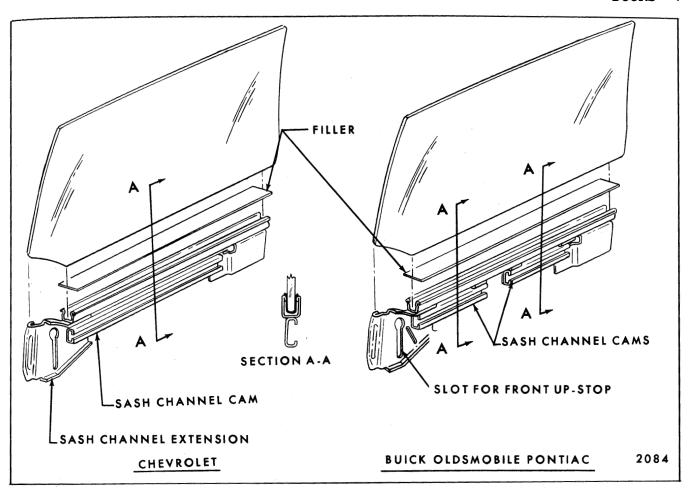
Front Door Window Assembly - "A-17 and 67" Style
